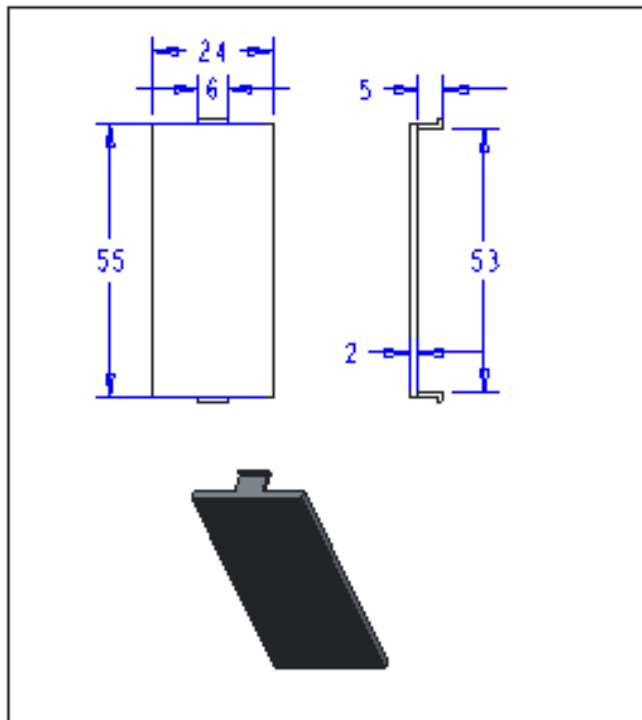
CAD Model of Sample Component for Cold Spray Coating
